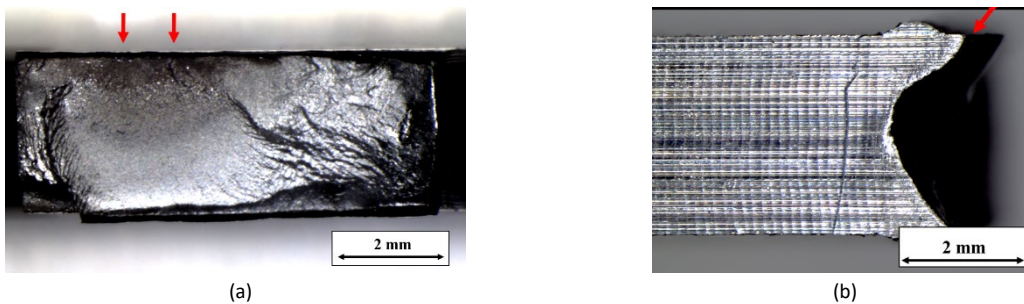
(a) fracture surface of LasTIG weld and (b) fracture profile of laser weld, both S700MC (red arrow indicates fatigue crack initiation site)
